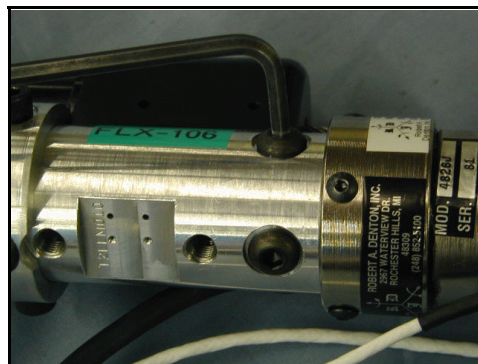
Remove bolts from bottom of tibia tube (front and sides)
